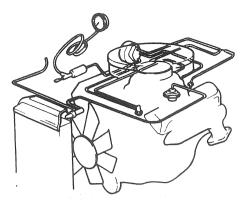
Typical vacuum gauge installation. (Courtesy of Chrysler Motors Corp.)
